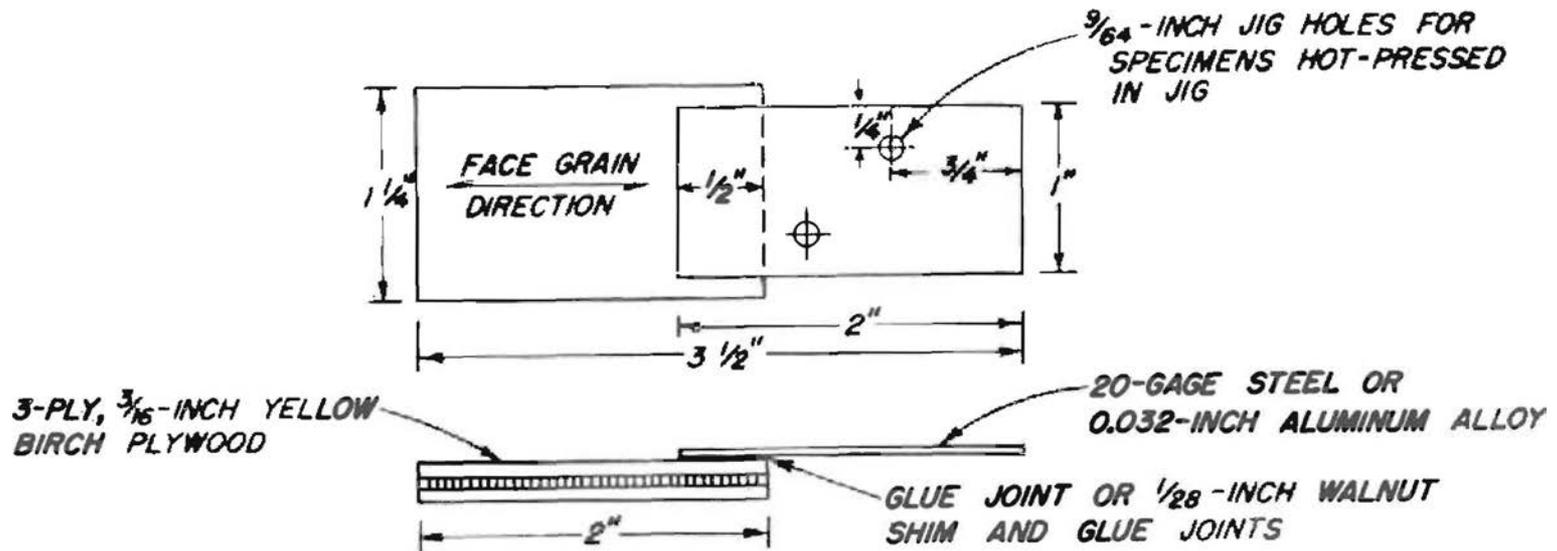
Plywood-to-metal glue-joint test specimen with and without walnut shim.
